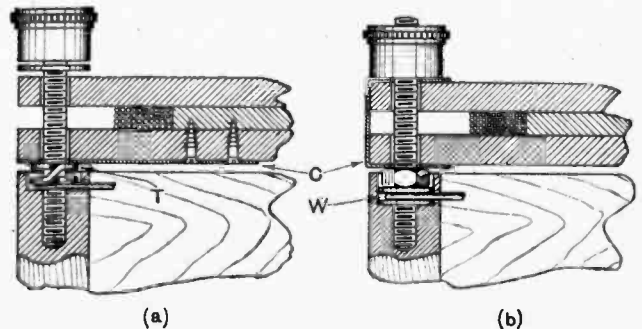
Alternative methods of making contact with the frame aerial windings.
